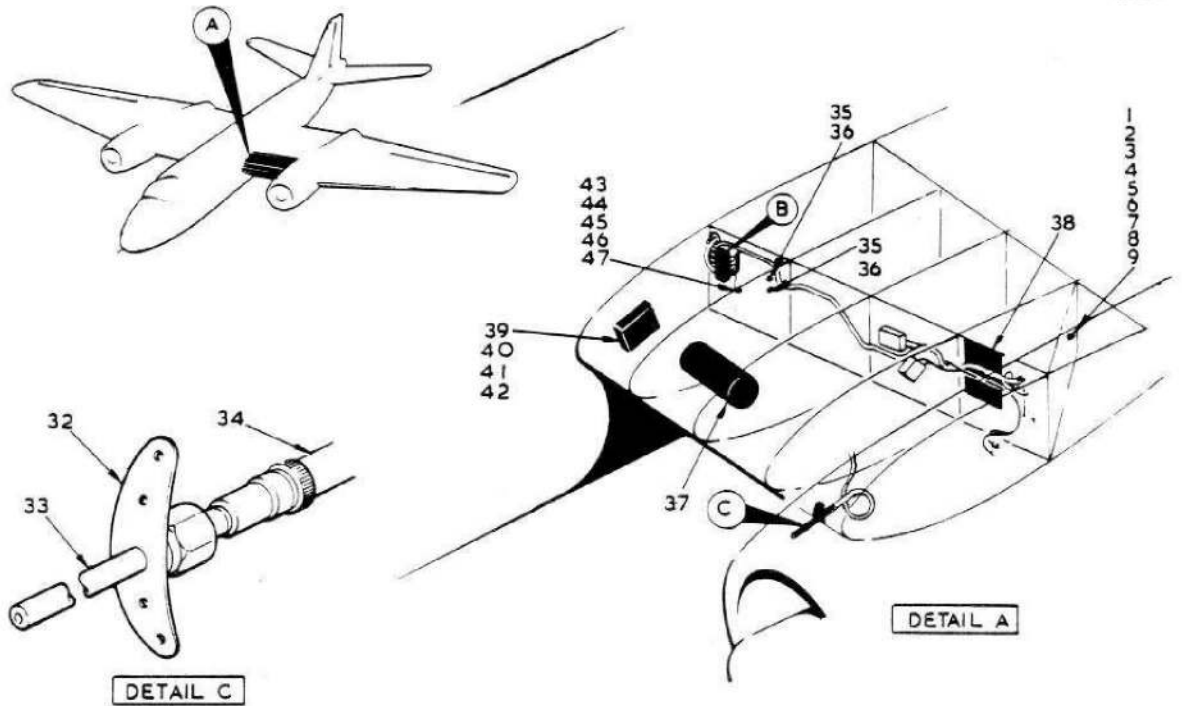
ELECTRICAL EQUIPMENT IN WINGS
